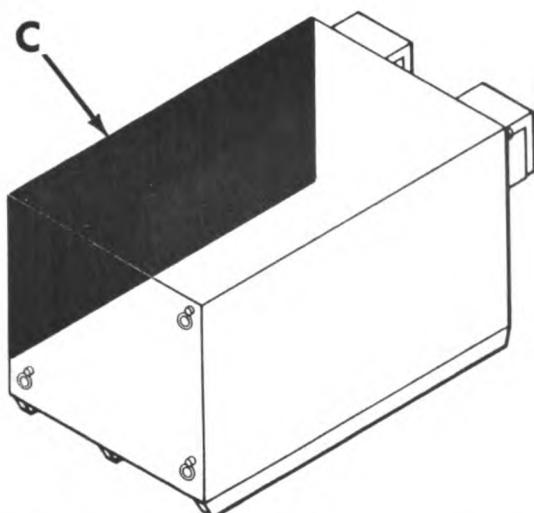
Utilities Installation, Front and Rear Wall Equipment
